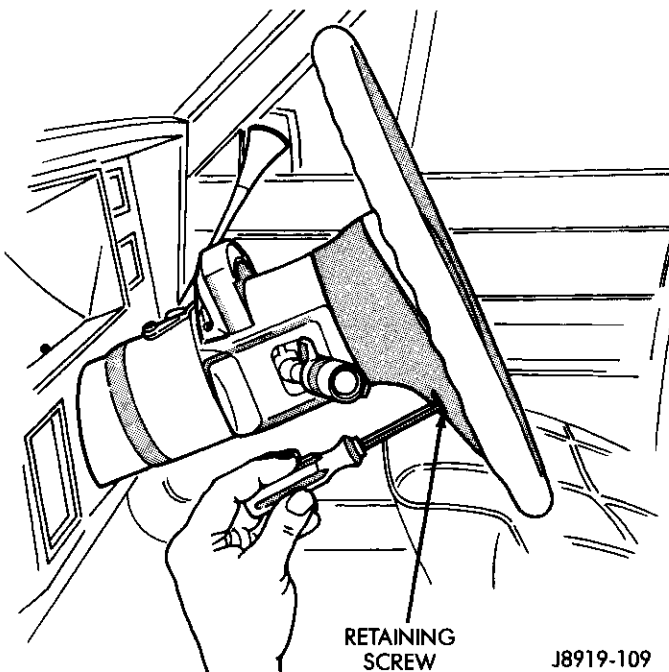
Standard Steering Wheel Cover Removal/Installation
